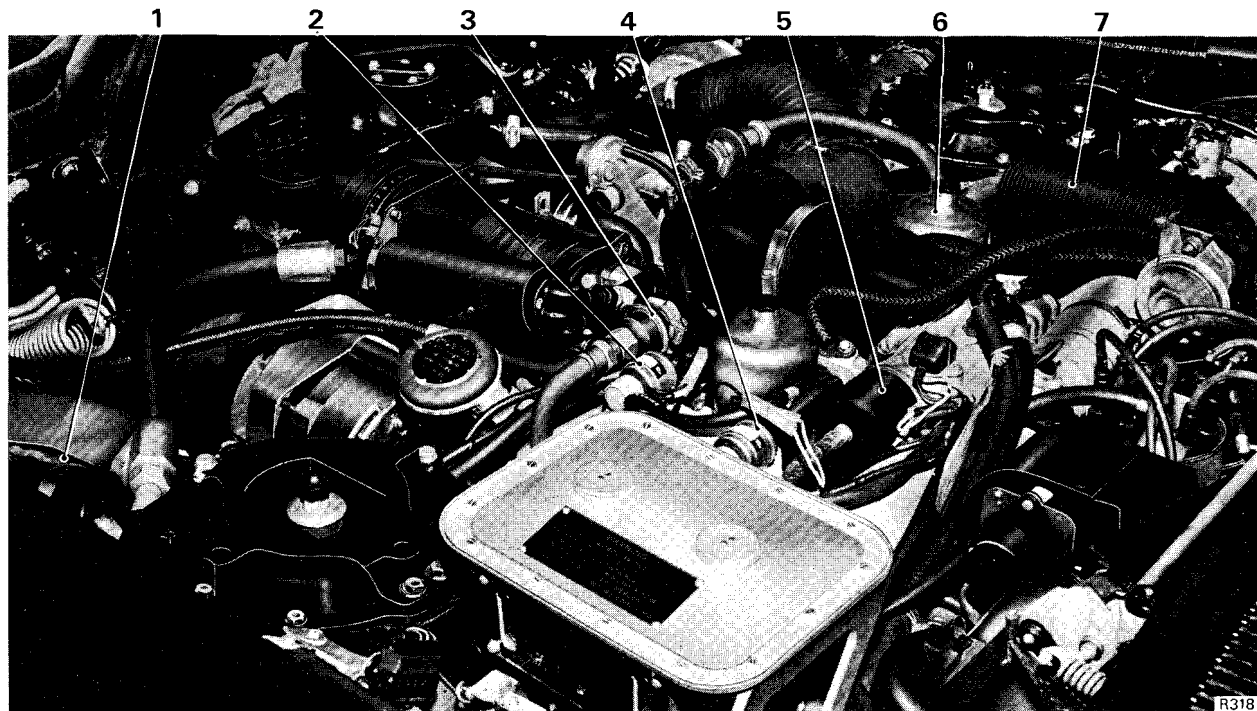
VIEW INSIDE ENGINE COMPARTMENT (From Left-hand Side of Car)
